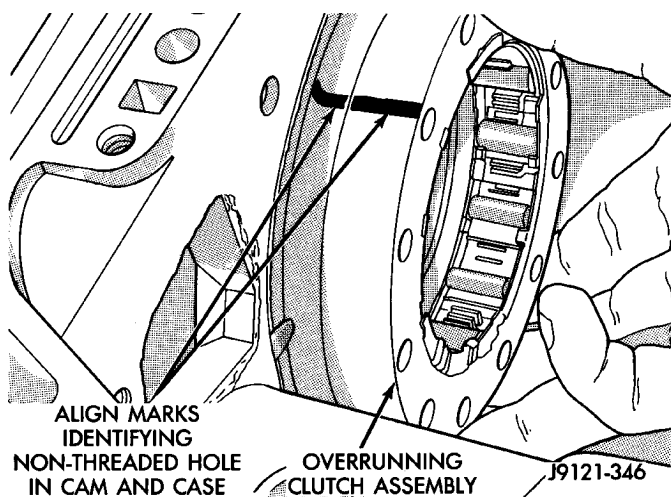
Location Of Non-Threaded Hole In Clutch Cam
